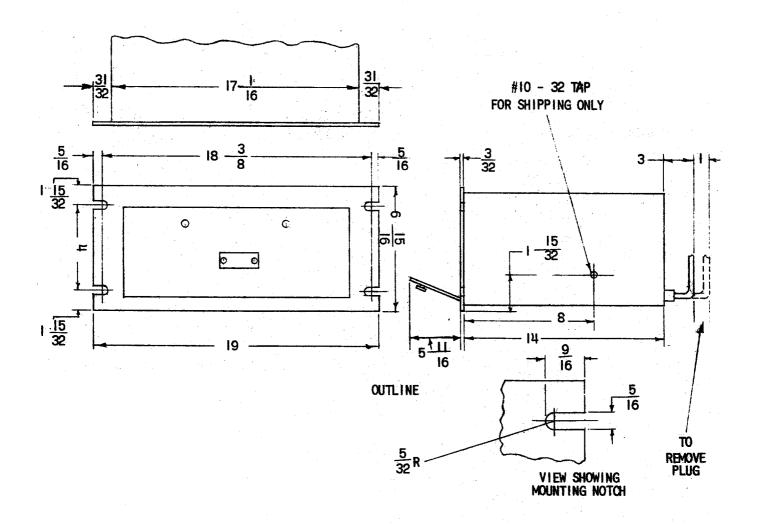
(0227A2037-0) SLC53B Outline And Mounting Dimensions
